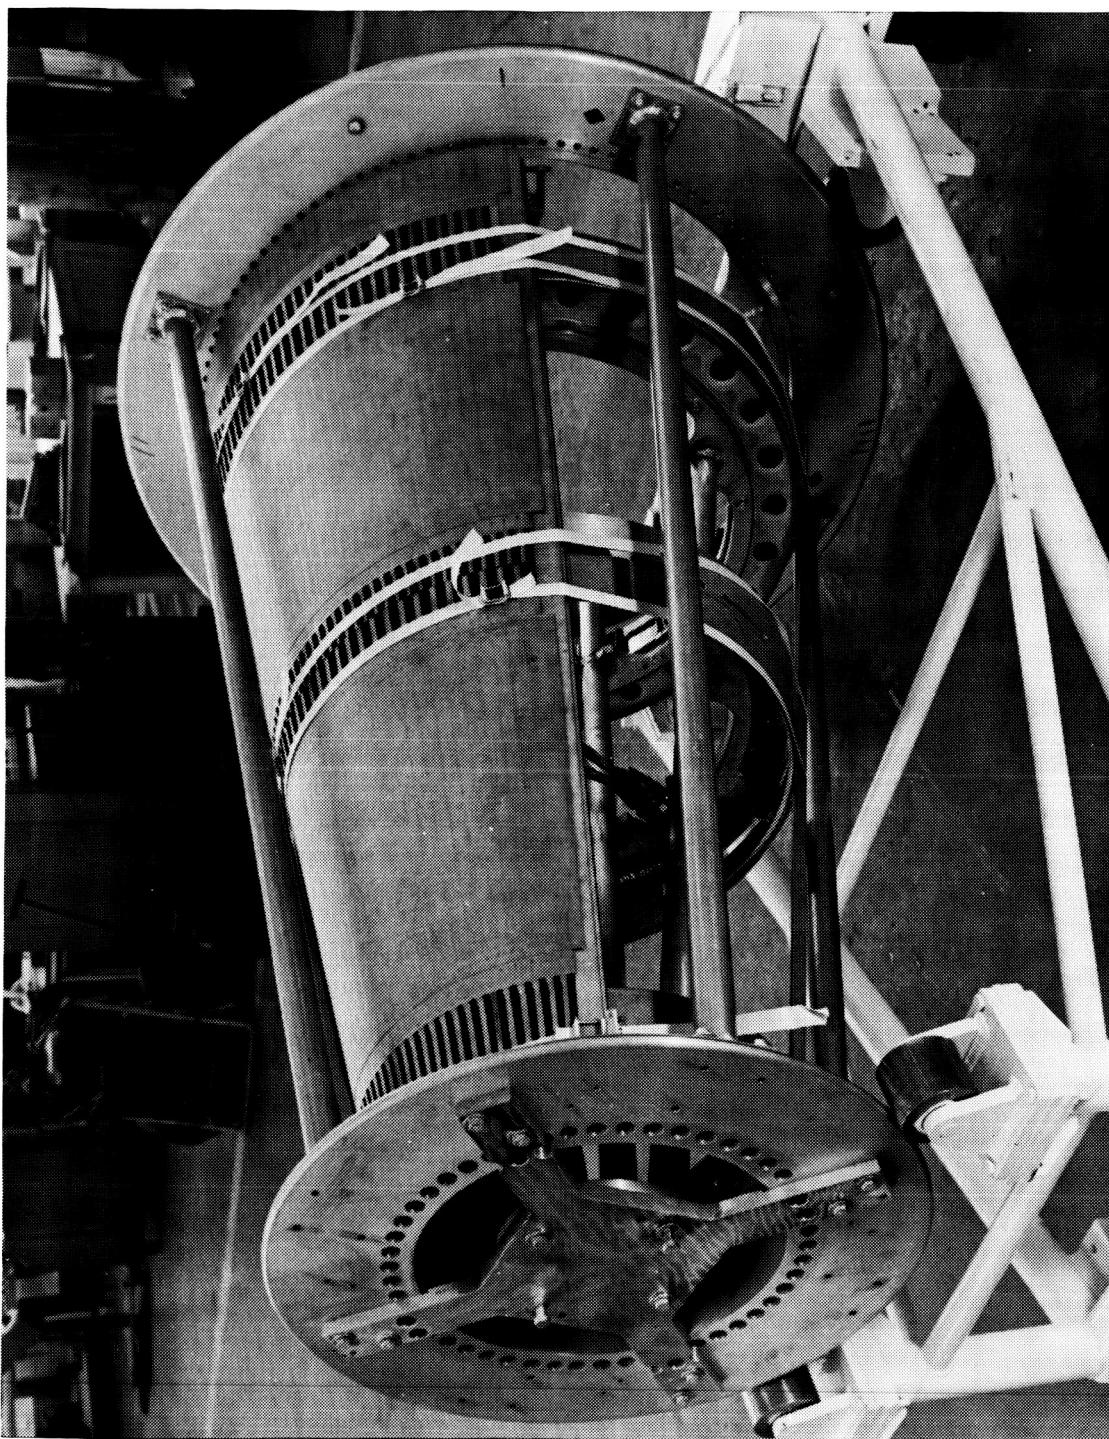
Fitting of Skin Panels, Longerons, and Ring
